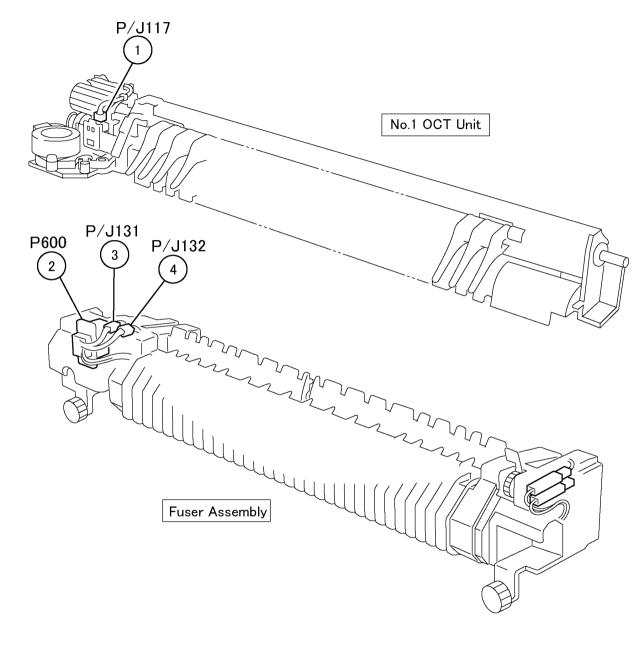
No.1 OCT, Fuser Assembly (j0st7206)
